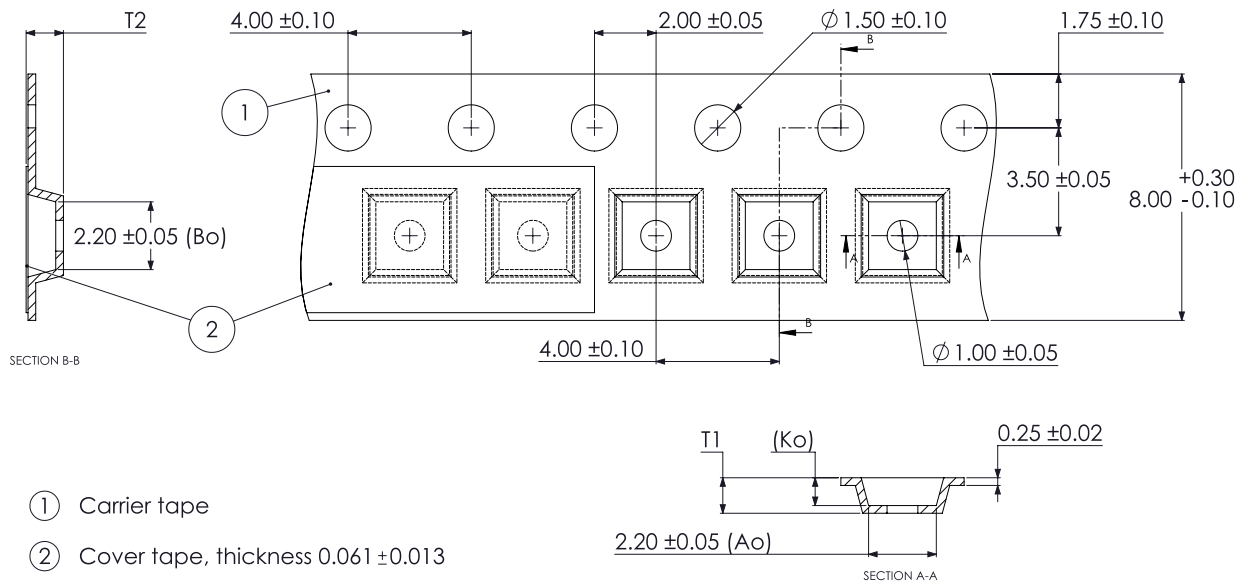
Pocket Tape dimensions for LUXEON CZ Color Line.
